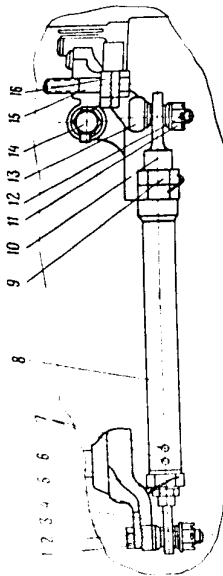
Attachment of HP-10A Pump to MV-3 Control Panel
